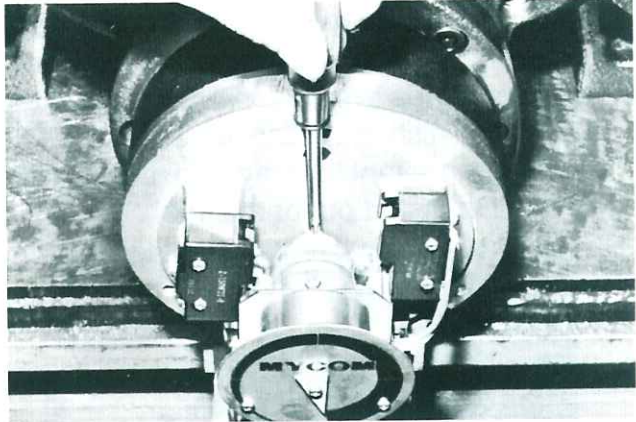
Loosening Micro-switch Cam Fixing Screw
